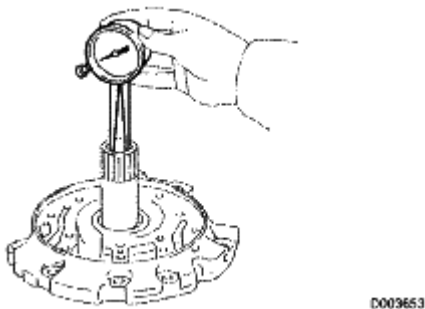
Measuring Inside Diameter Of Stator Shaft
